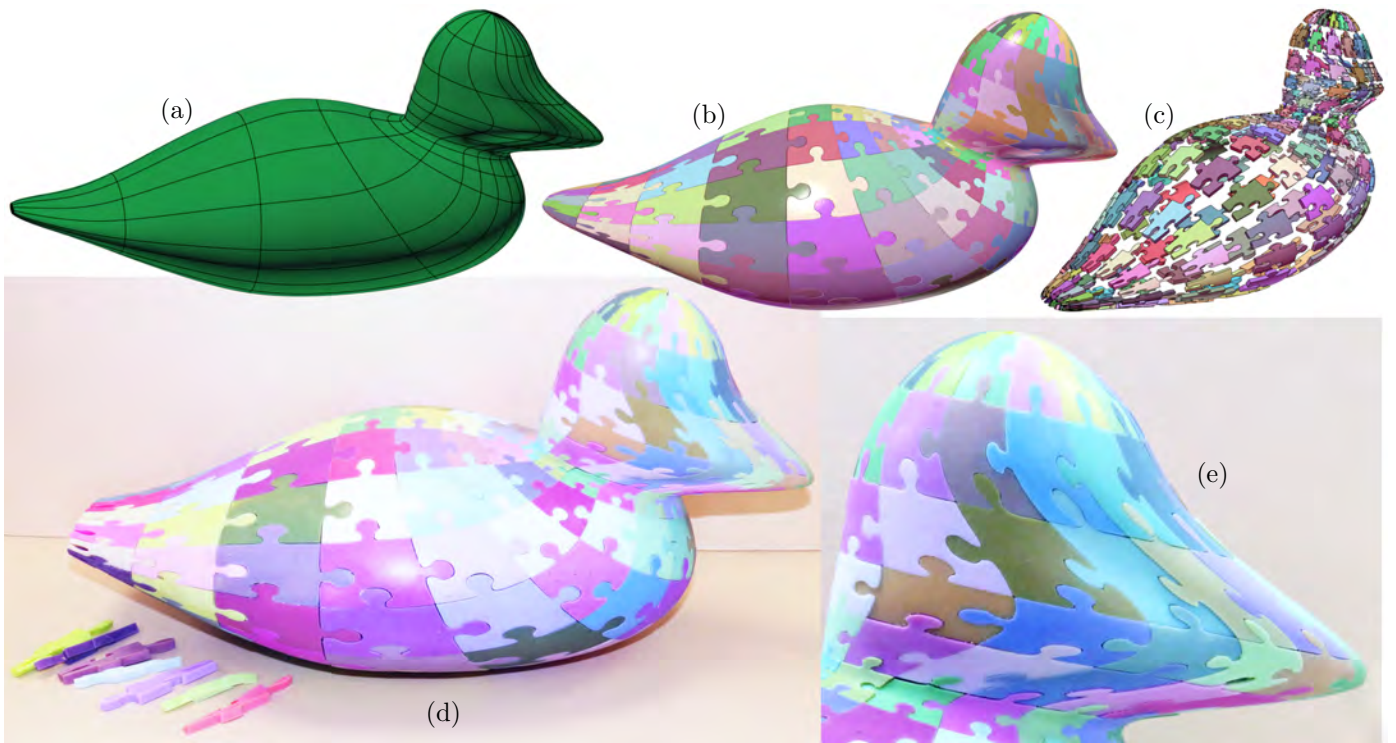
A duck Puzzle. The surface model of a duck in (a), is employed to create the 3D puzzle in (b), that is also shown exploded in (c). Each tile is uniquely colored. In (d), a 3D printed model of the puzzle is presented and (e) shows a zoom-in on the head. Note the tail of the duck is not fully assembled and some of the puzzle tiles near the tail are shown on the side in (d).
